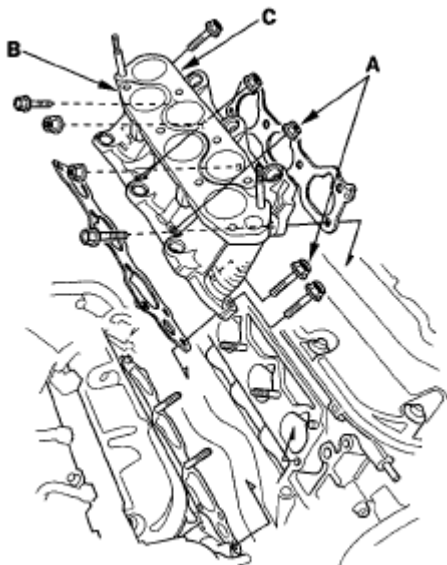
Identifying Injector Base Mount Bolts/Nuts, Front Injector Base And Rear Injector Base
